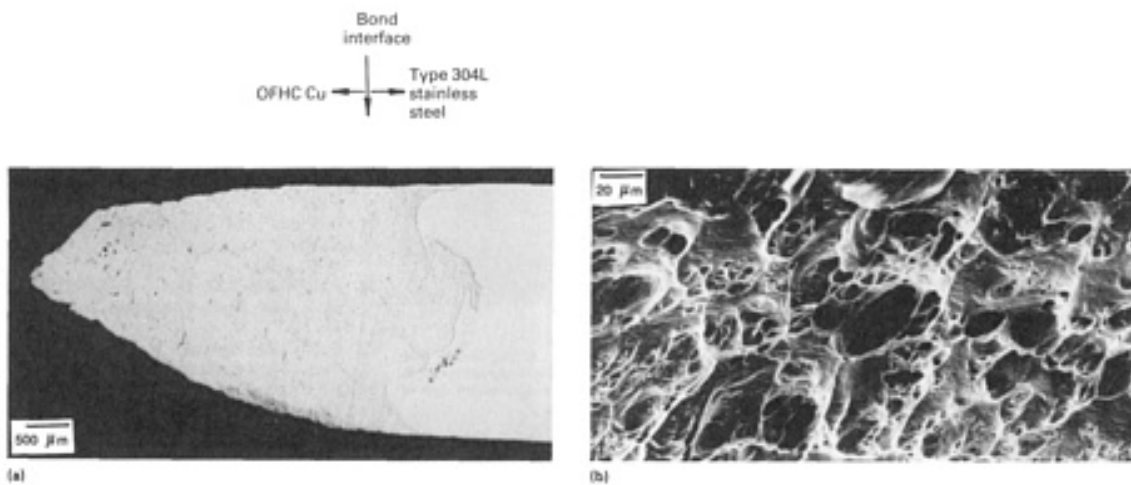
FAILURE IN COPPER-TO-STAINLESS STEEL TENSILE SPECIMEN THAT WAS EXPLOSION WELDED. (A) PHOTOMICROGRAPH OF FAILED SPECIMEN SHOWING WAVY BOND LINE AND DUCTILE FRACTURE IN PARENT COPPER METAL. 16 \times . (B) SCANNING ELECTRON FRACTOGRAPH OF COPPER FRACTURE SHOWING DIMPLED APPEARANCE OF TYPICAL DUCTILE TENSILE OVERLOAD FAILURE. 395 \times
